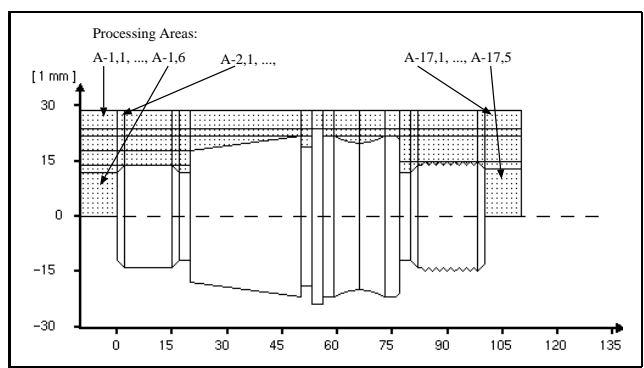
Geometrical representation of a workpiece and the cylindrical raw material.
